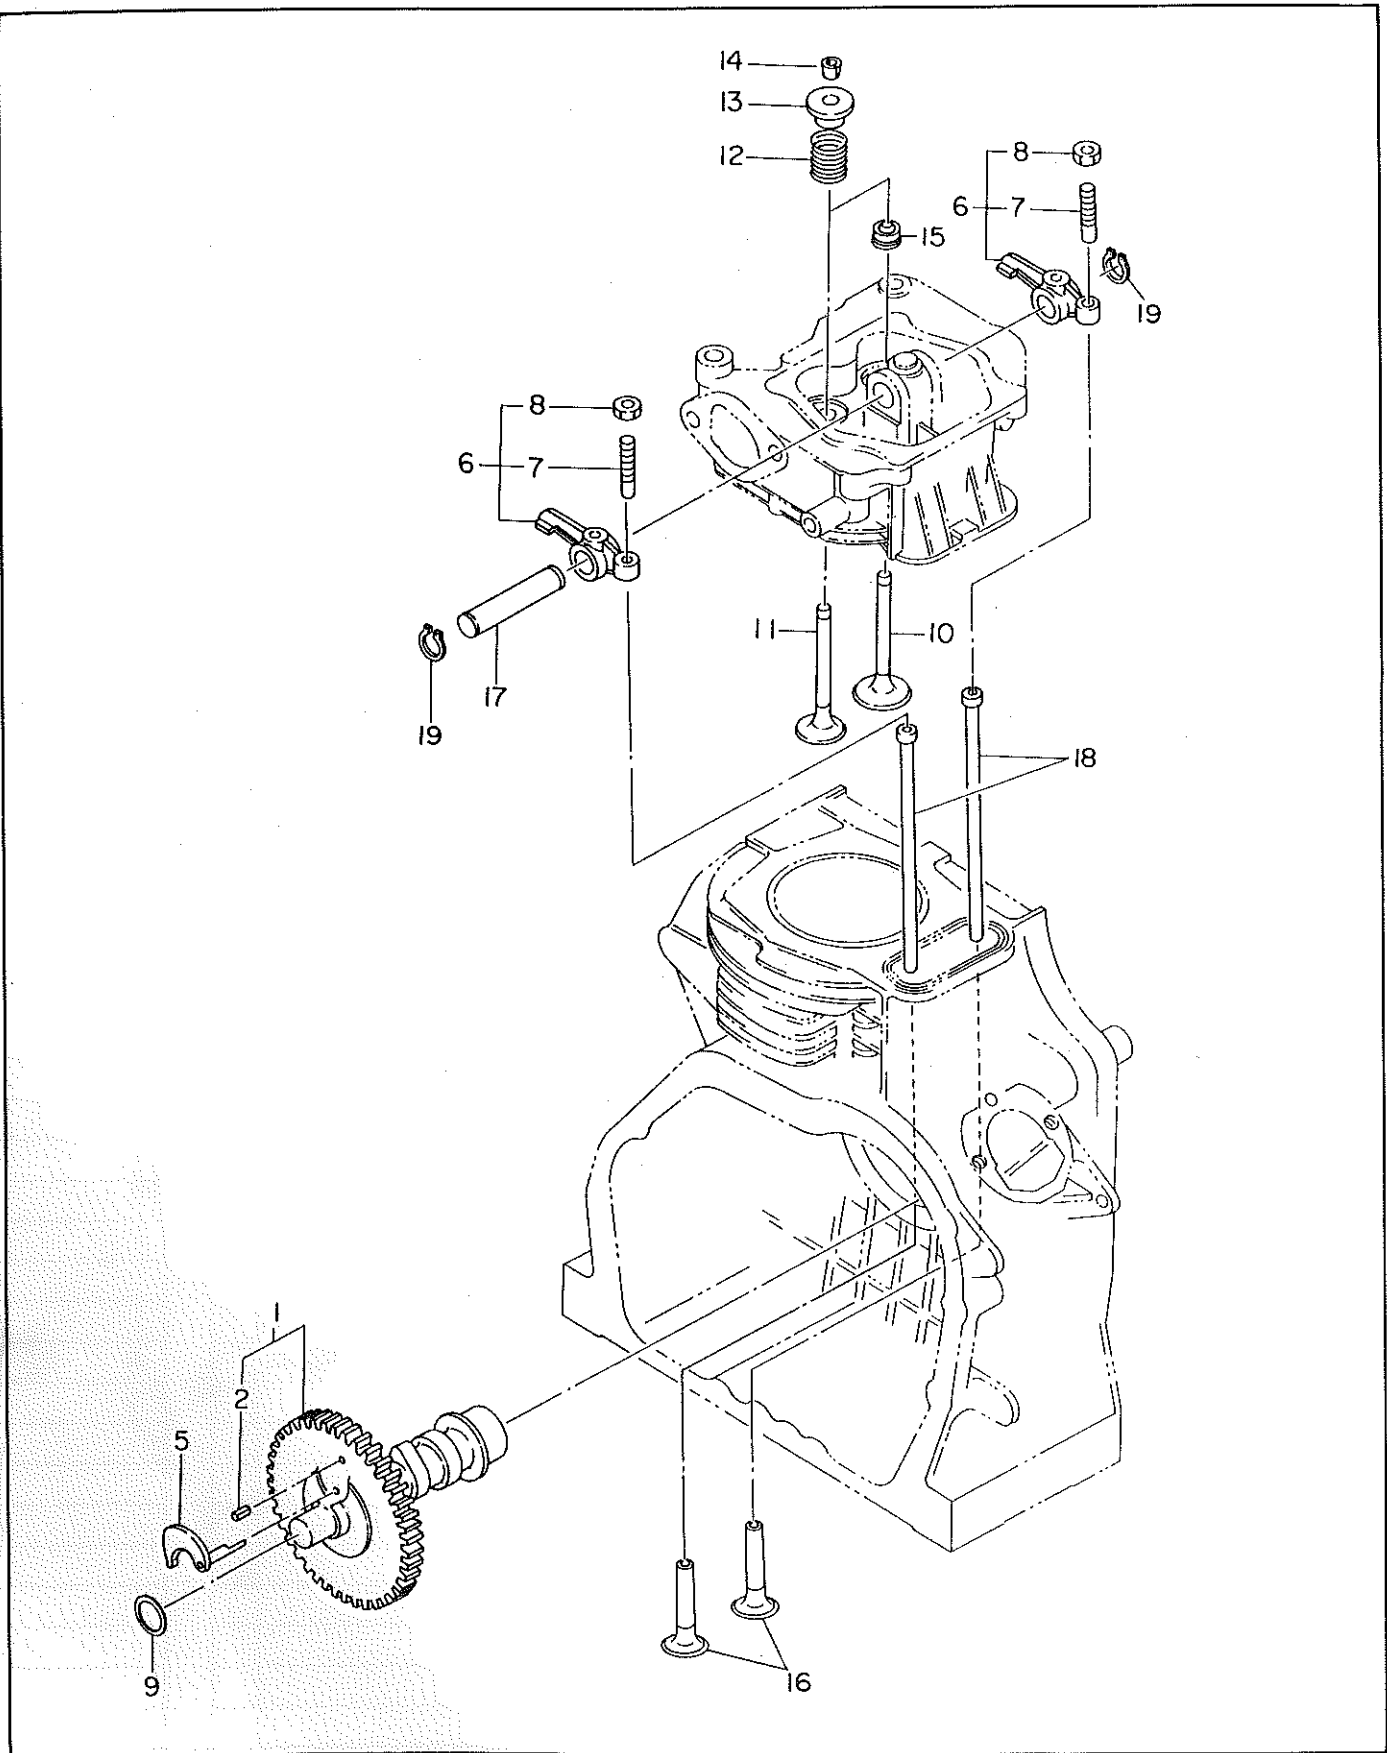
CAMSHAFT and VALVE ROCKER GROUP
